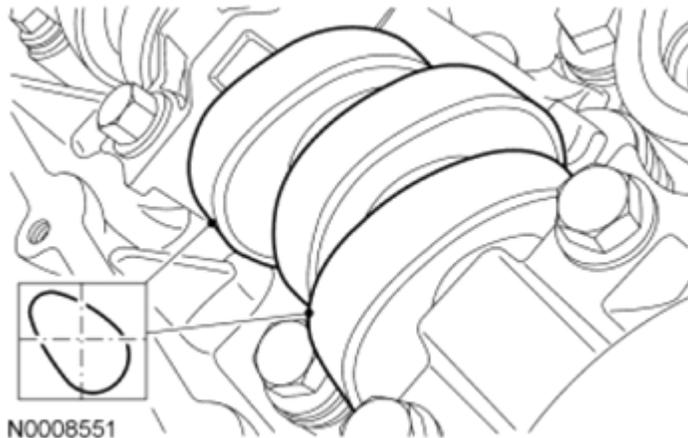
View Of Intake Camshaft Lobes And Exhaust Lobe On No. 1 Cylinder
